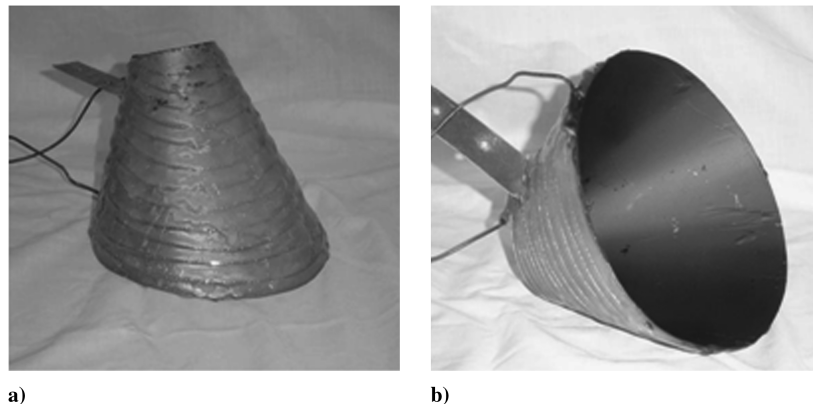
Camera shroud: a) top view of the camera shroud with the heating coil visible and b) bottom view of the camera shroud with the dark coating visible.
